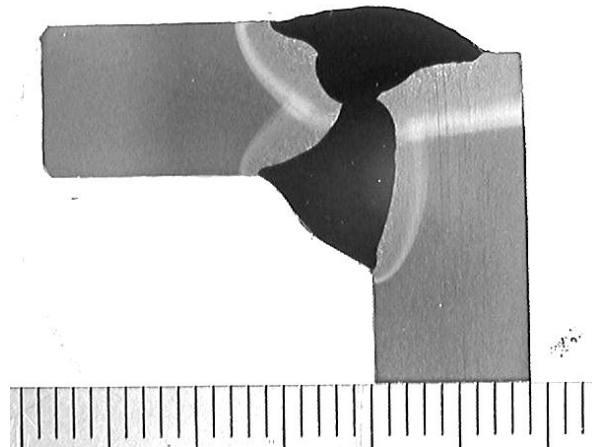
Macrograph of the weld cross-section produced with parameters detailed in Table 3-11 - Test 11. Note: Scale is in millimetres.
